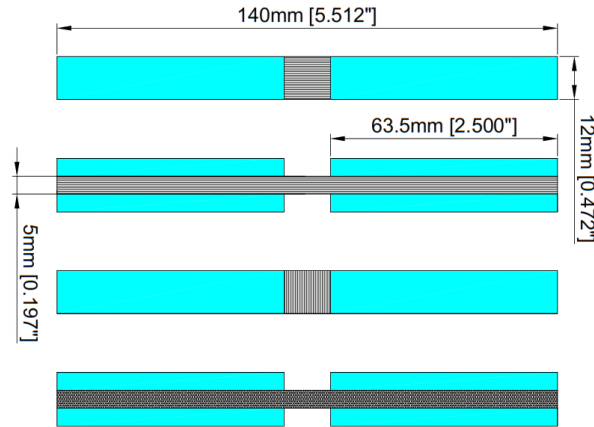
ASTM D6641 samples for compressive tests (Top: 0, Bottom: 90)
